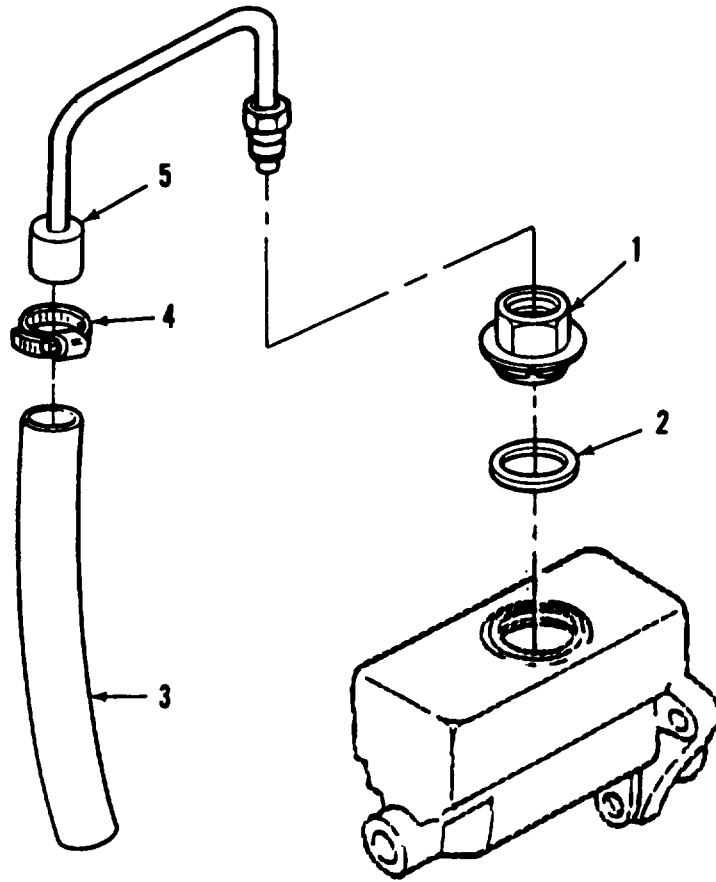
MASTER CYLINDER ASSEMBLY.
